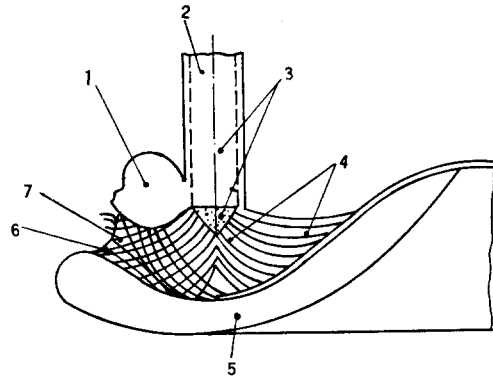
Gas cushion under droplet. 1-droplet; 2-tubular wire; 3-core; 4-shielding gas flow; 5-weld pool; 6-arc; 7-gas cushion
